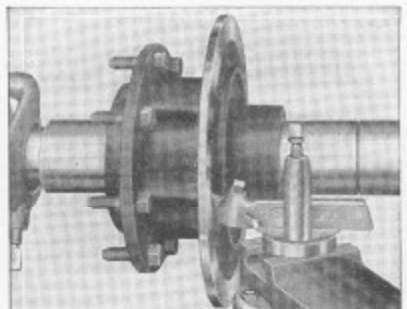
Truing the Flange of a Heavy Duty Truck Wheel Hub.
